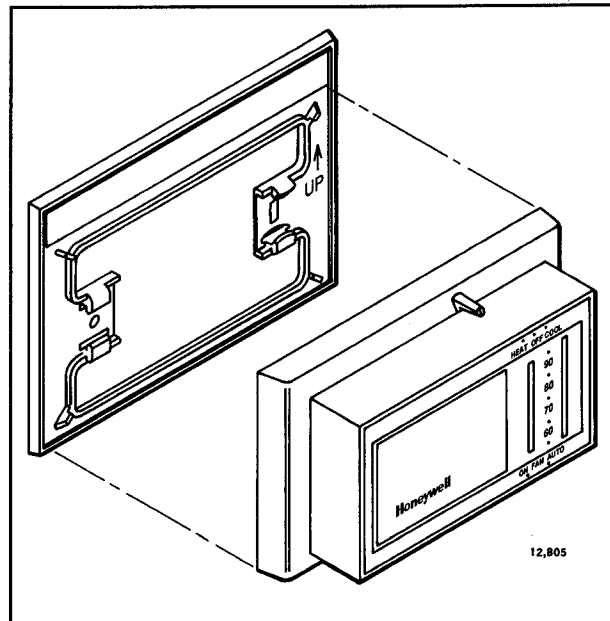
MOUNT SUPER TRADELINE T8034C THERMOSTAT ON THE WALLPLATE.
